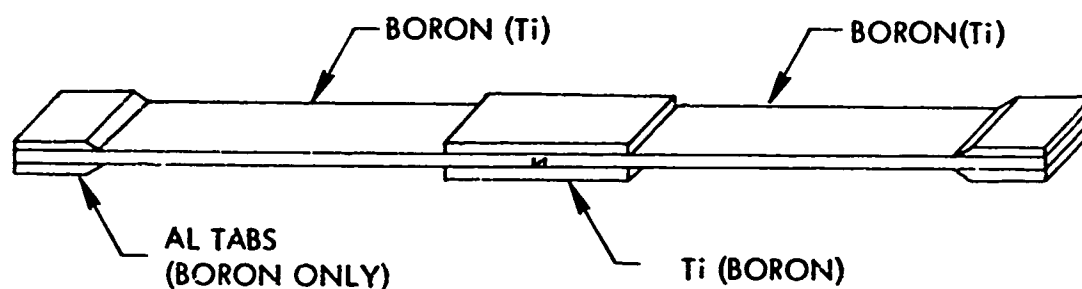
EDGE VIEW OF CONFIGURATION "C" SPECIMEN
